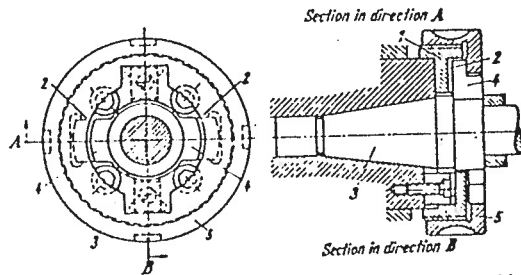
Milling spindle nose. 1—Driver with machined slots for 2; 3 arbor with flange and driving tongue 4 machined from solid; 5—Clamping nut.
